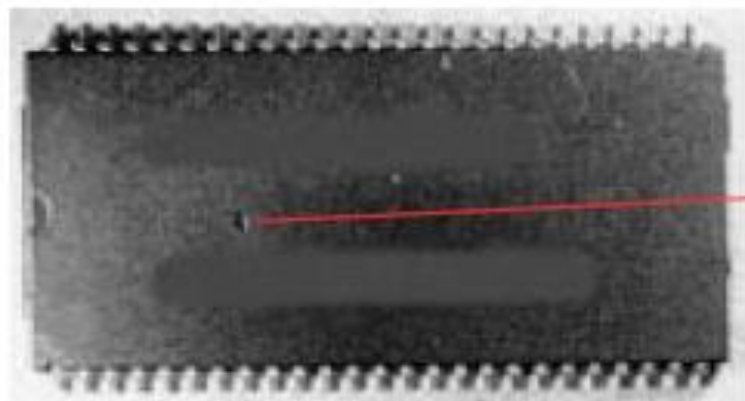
Damage on Wire Due to Ultrasonic Fatigue
